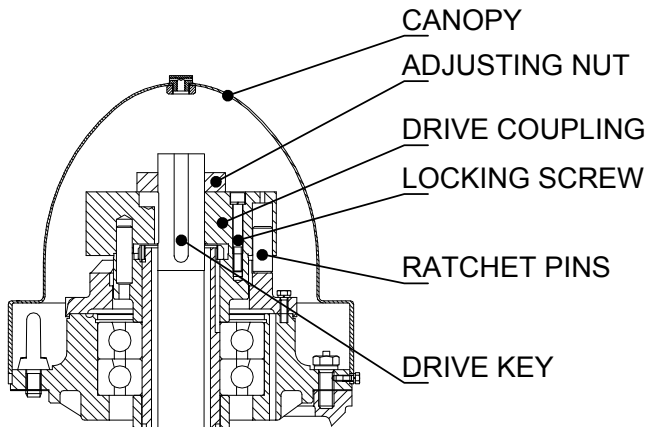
COUPLING ASSEMBLY DRAWING
